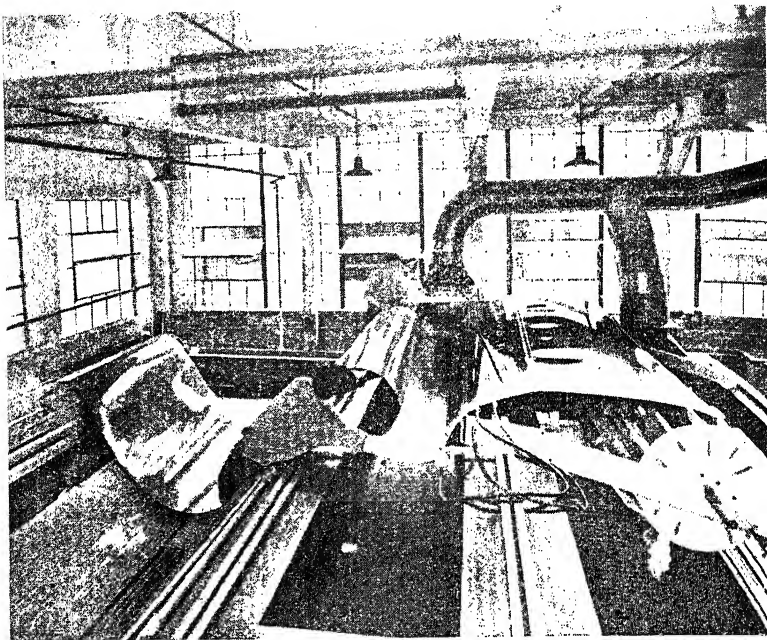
A REEL OF ALCLAD ALUMINIUM ALLOY SHEET SHAPED FOR THE OUTER SKIN OF A SECTION OF THE 41-TON BOEING PAN-AMERICAN CLIPPER'S WING
